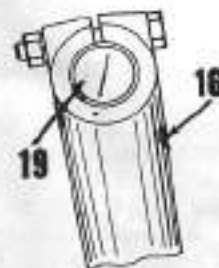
When installing steering arm on model 880 or 990, be sure that punch mark on steering arm (16) is aligned with chisel mark on cross shaft (19).
